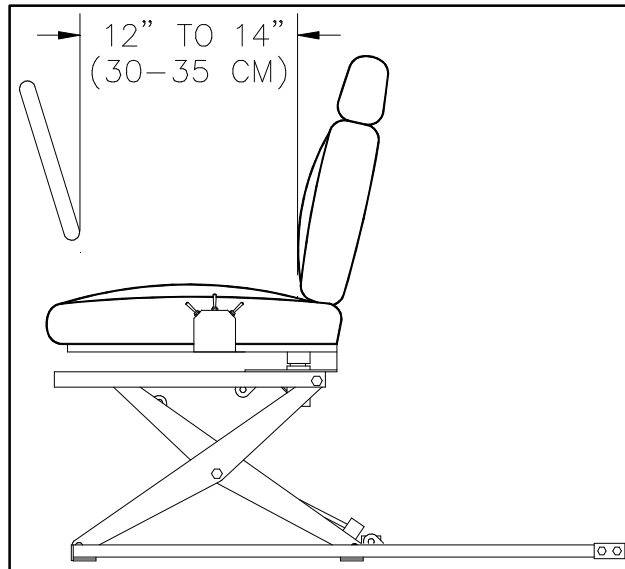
WHEEL-TO-SEAT CLEARANCE
